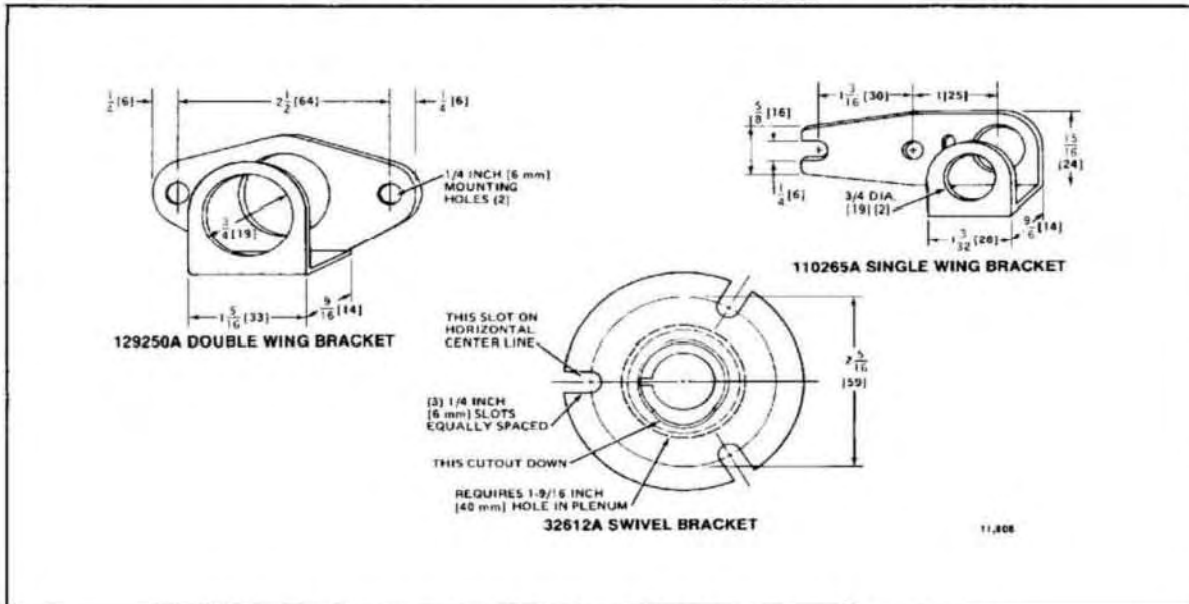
MOUNTING DIMENSIONS IN in. [mm IN BRACKETS] OF BRACKETS.
